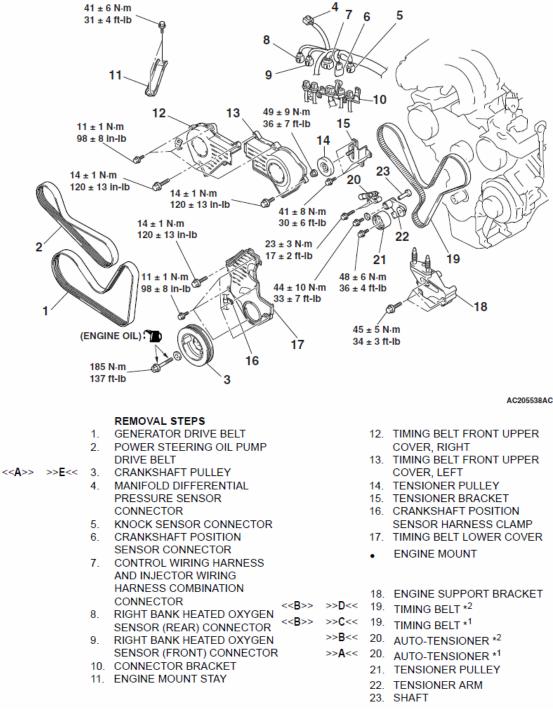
Timing Belt Components With Torque Specification Courtesy of MITSUBISHI MOTOR SALES OF AMERICA.
